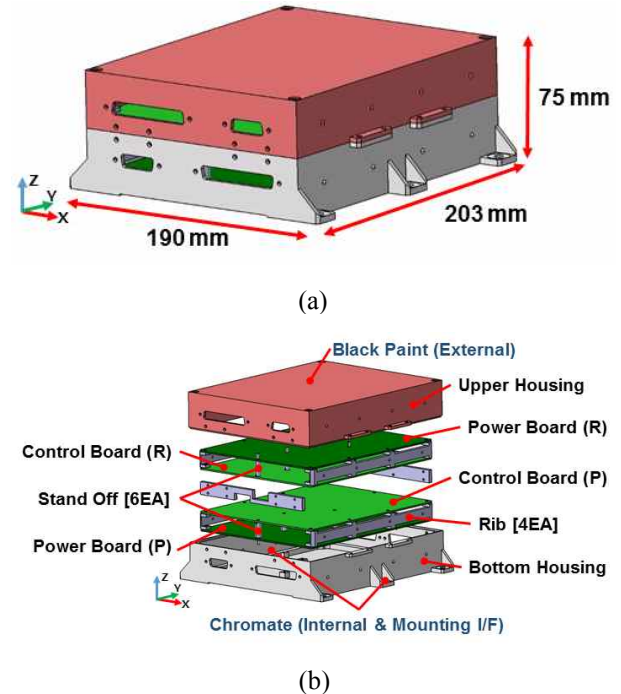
Configuration of APD [(a) Isometric View, (b) Exploded View]
